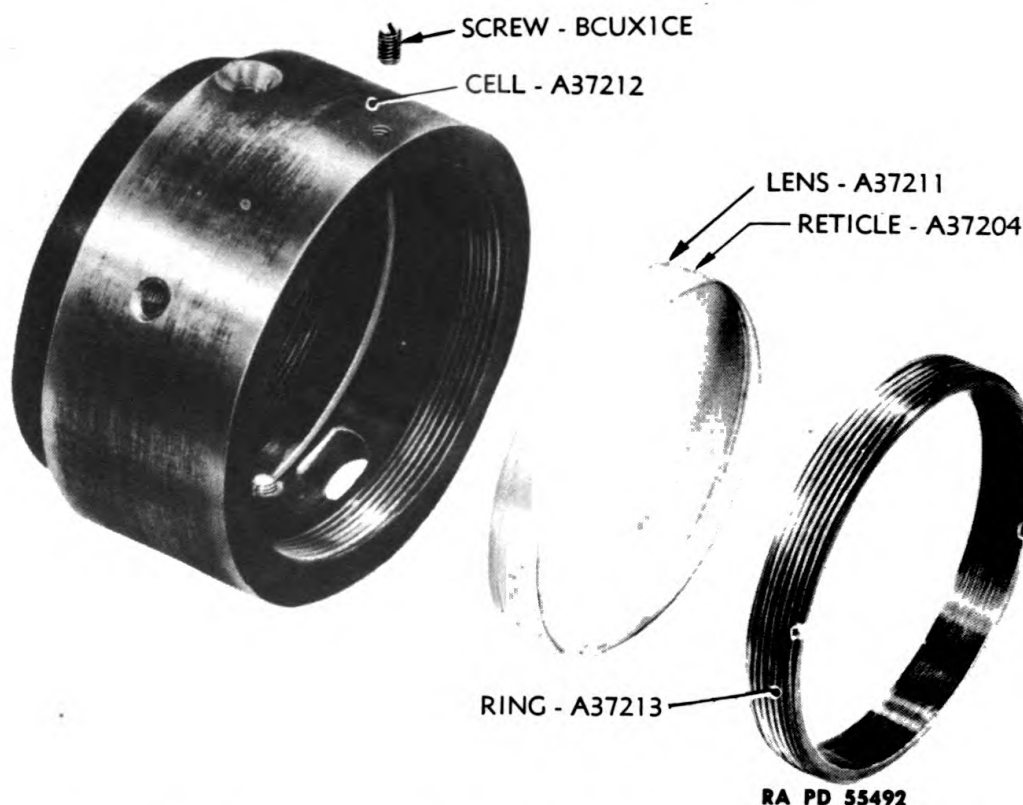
Telescope M3—Reticle Cell Assembly Disassembled
